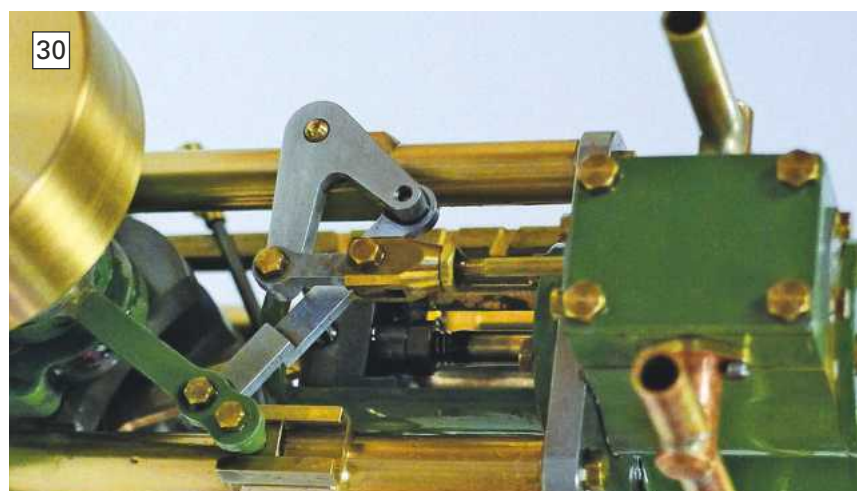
A close-up of the reversing linkage on a TVR1A engine. The slide valve control rod can quite clearly be seen connected to the end of the linkage.
